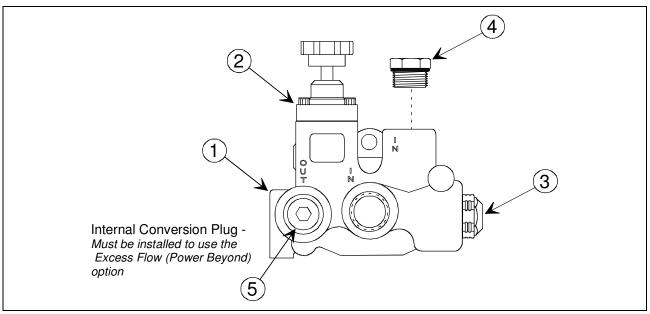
No. 07737xxx Inlet Cover Assembly – Using 07736xxx Inlet Cover Housing
